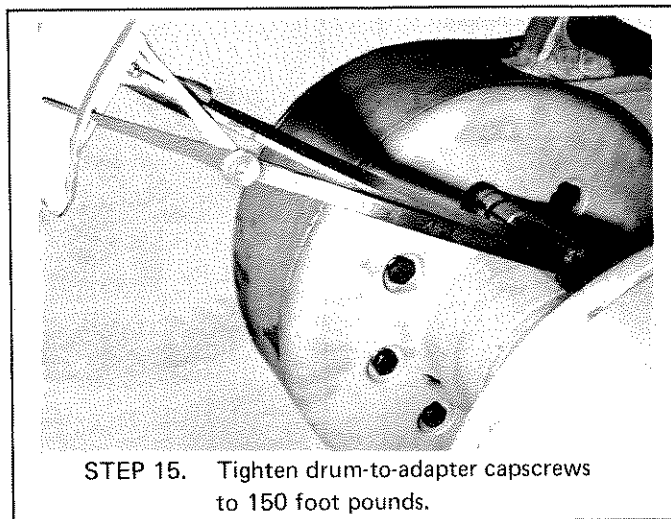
Installation of Drum And Drum Shaft (Sheet 2 of 3)
